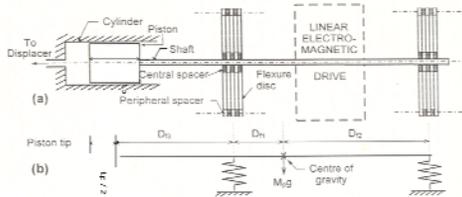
Assembly of the flexure bearing a. Schematic diagram b. Simplified model
